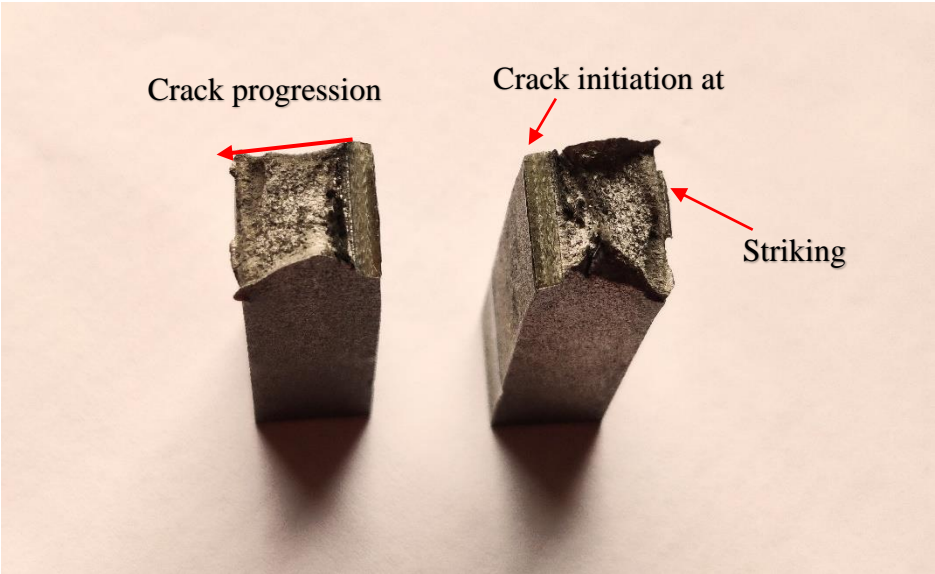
the face of the fractured Sample after rupturing of Sample ZZ1
